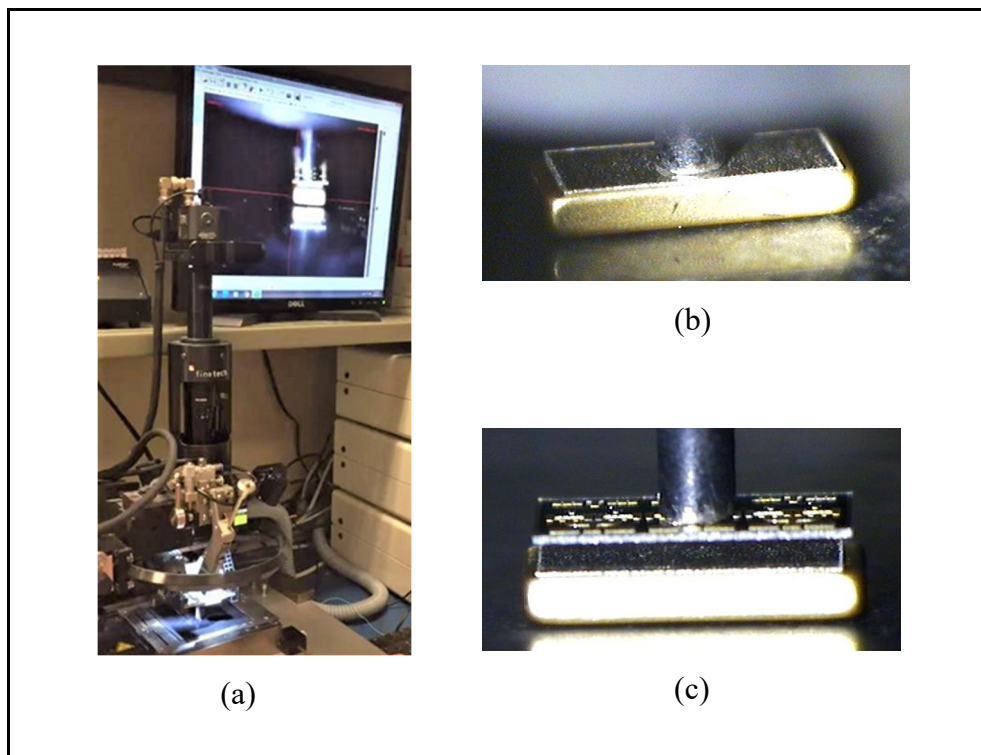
(a) Finetech Pico MA hot air welding/pick and place machine. (b) Mounting gold thin on copper-graphite (c) Mounting power bar on copper-graphite
